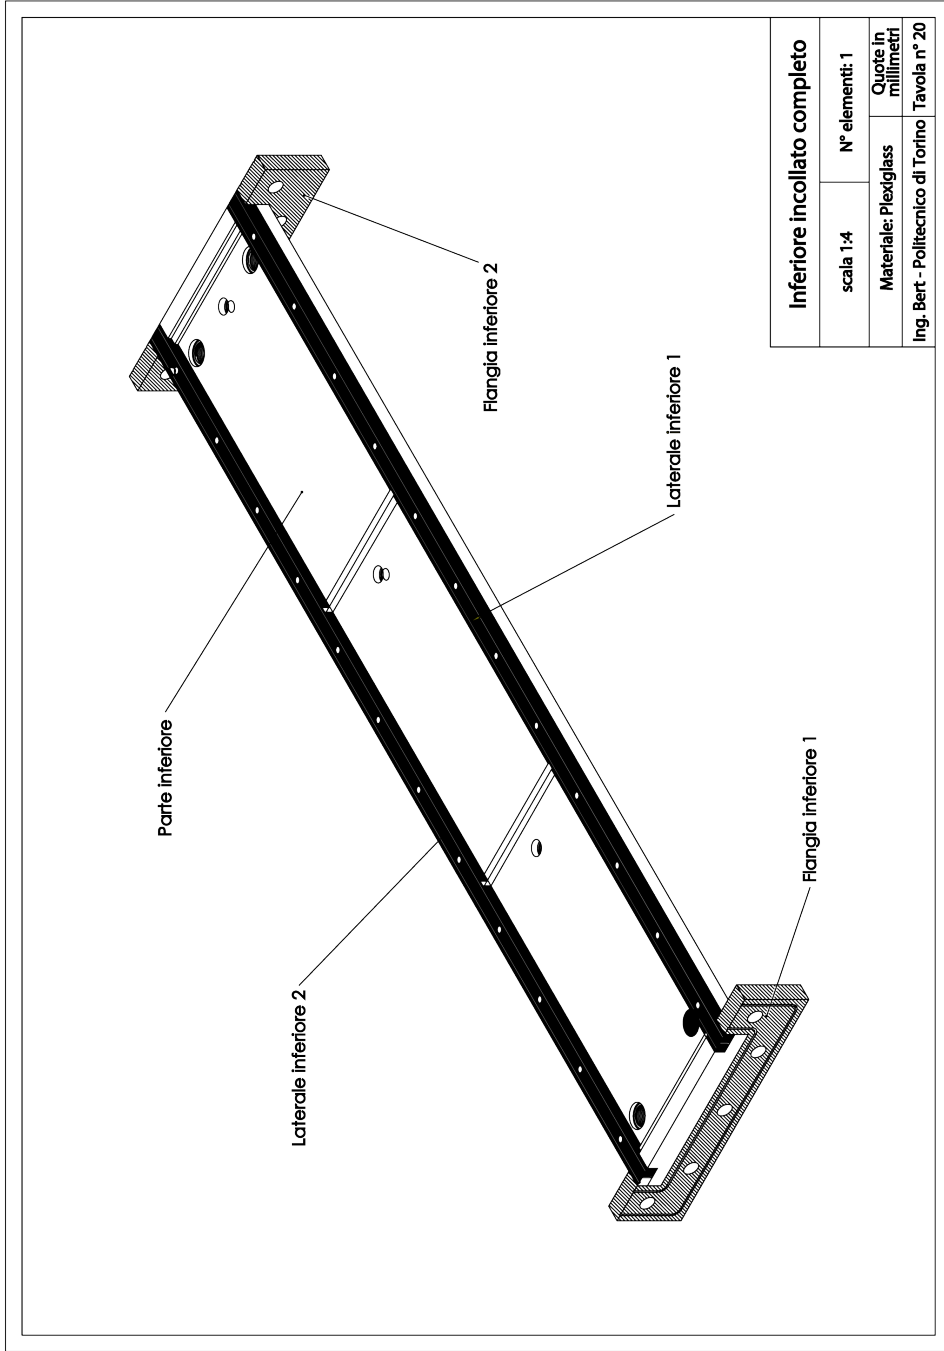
Assembly of the lower part of the test section for filtration tests.
